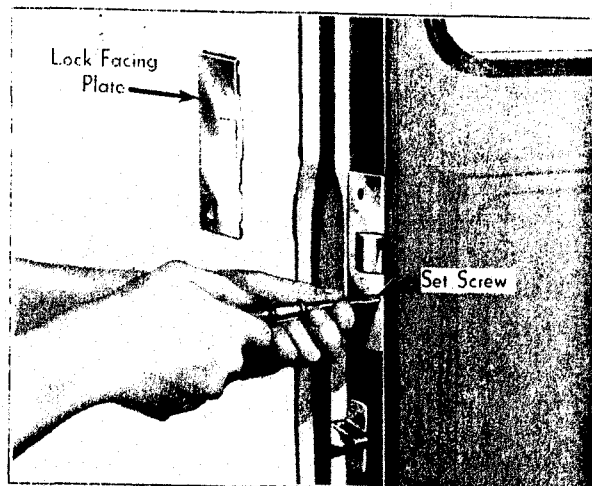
Door handles are held in place by a set screw concealed under the lock facing plate
